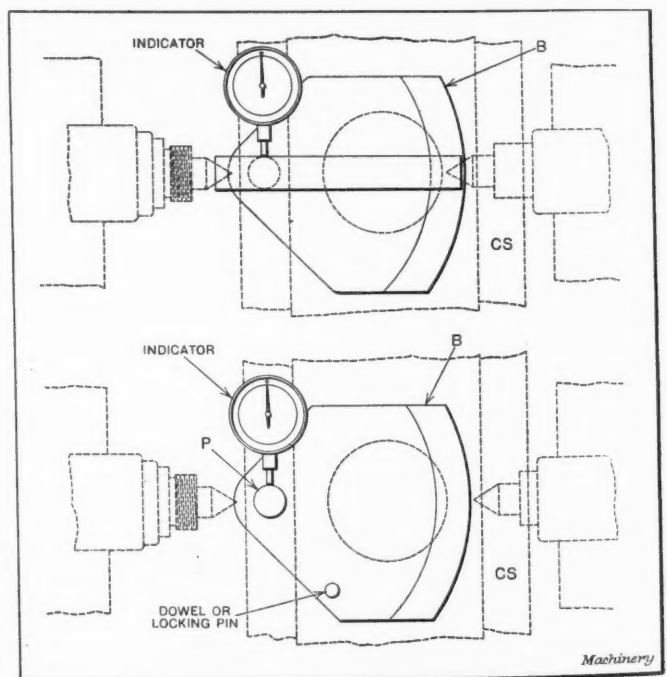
Method of Locating Attachment Pivot on Center Line of Lathe Spindle
